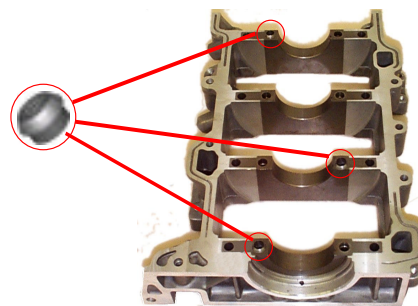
shows inexpensive methods for making QKC grooves and convex members. Quasi-Kinematic Grooves seats can be made by machining cast-in reliefs with a form tool. In many cases, this allows the simultaneous machining of the groove surfaces and drilled holes. Crowned pegs or balls can be pressed into or otherwise attached to the components. If crowned pegs are used, their axisymmetric geometry makes them well suited for production on screw machines. When purchased in volume, these pegs can be attained for roughly the same cost as hollow dowels.
